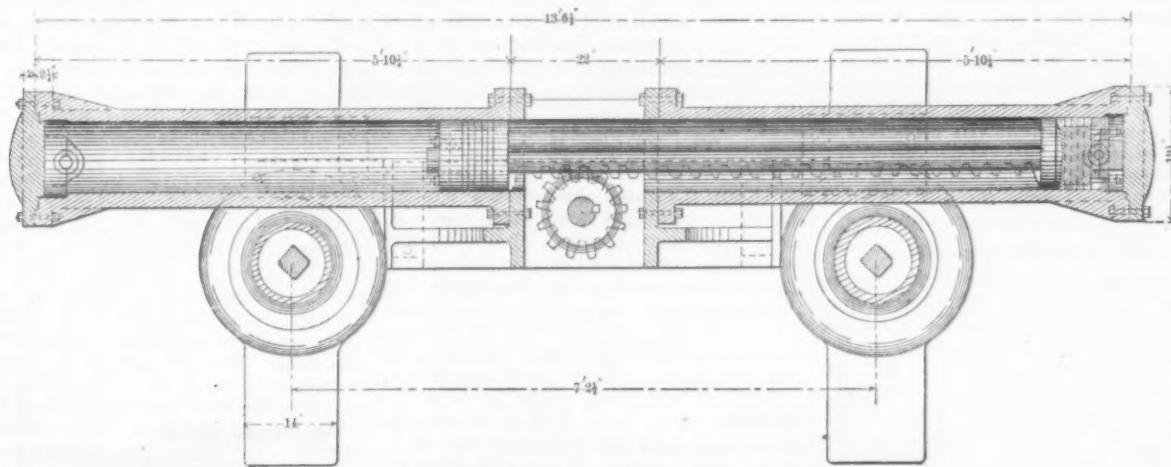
Sectional Plan Through Hydraulic Cylinders.
